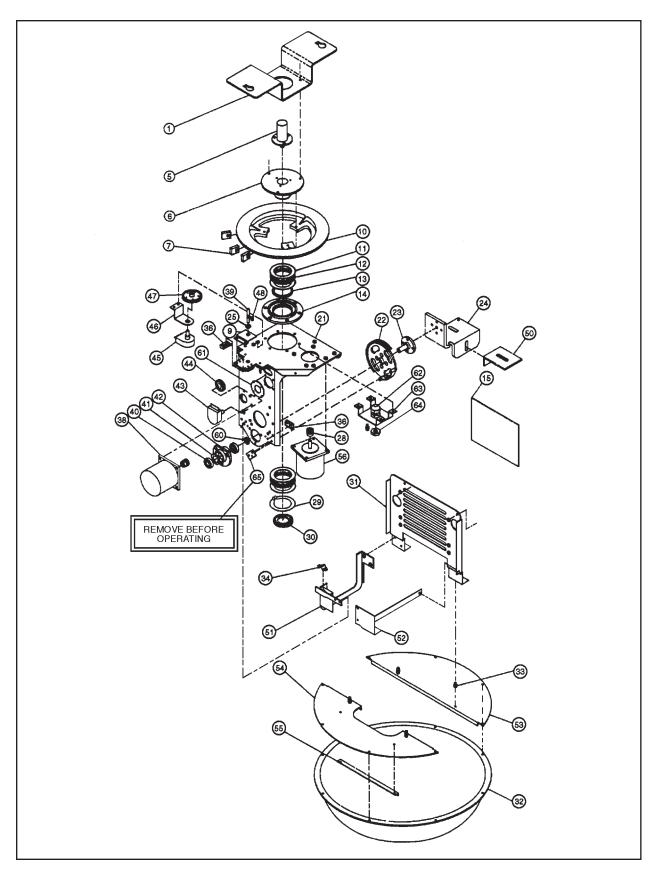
SB2600 Series Pan/Tilt Exploded Assembly Diagram
